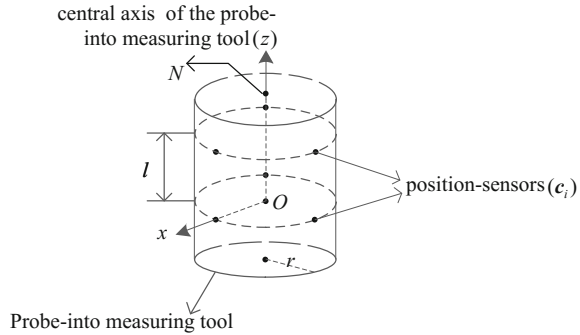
Main view of probe-in measuring tool of the robot of sleeve installation for printing machine
